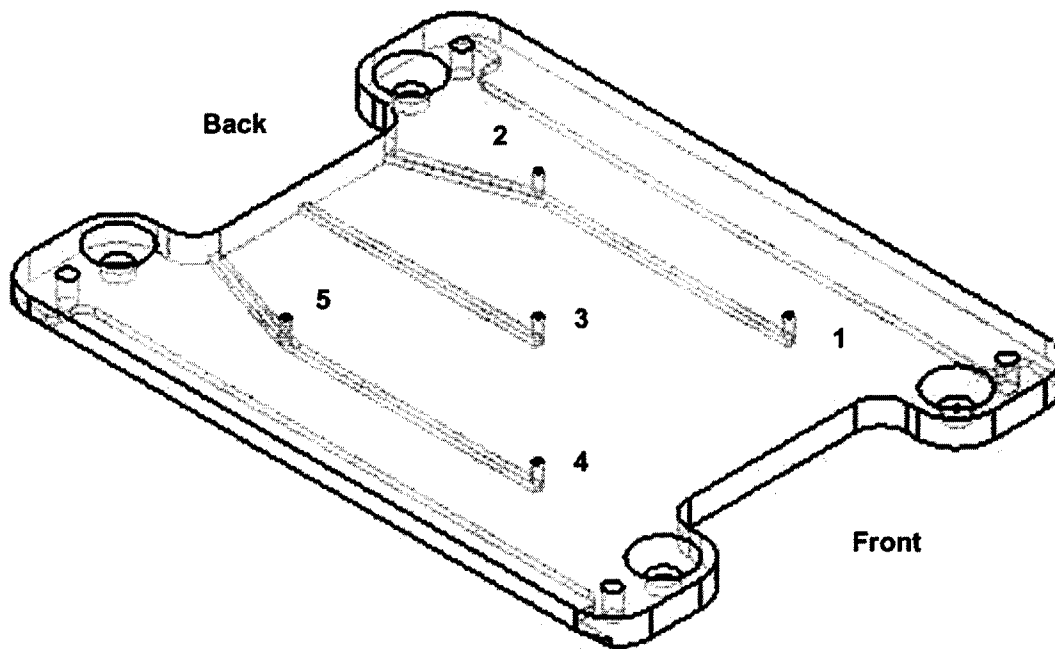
Bottom spacer plate with five thermocouple ports designed and machined by Dirckx [29]
